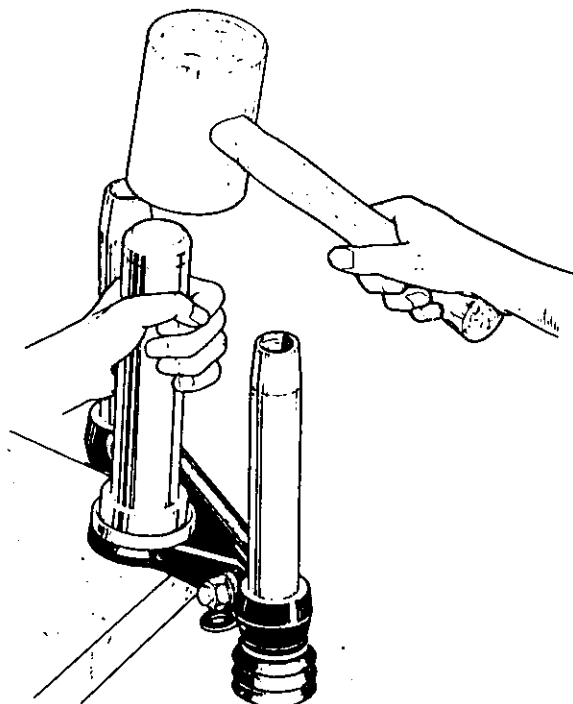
Replacing bottom cone using service tool No. 61-6009.
